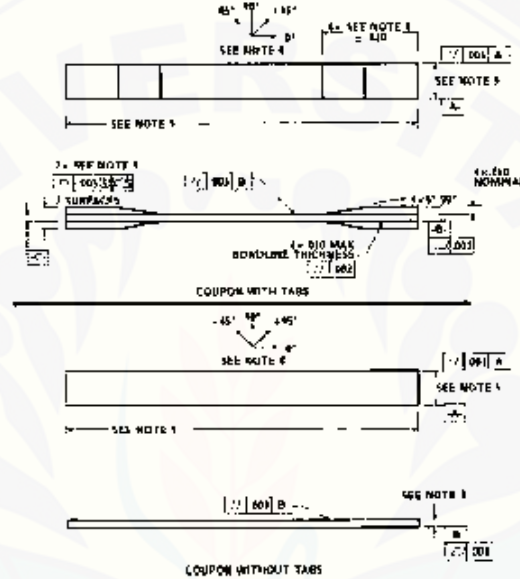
Tension Test Specimen Drawing (inch-pound)
